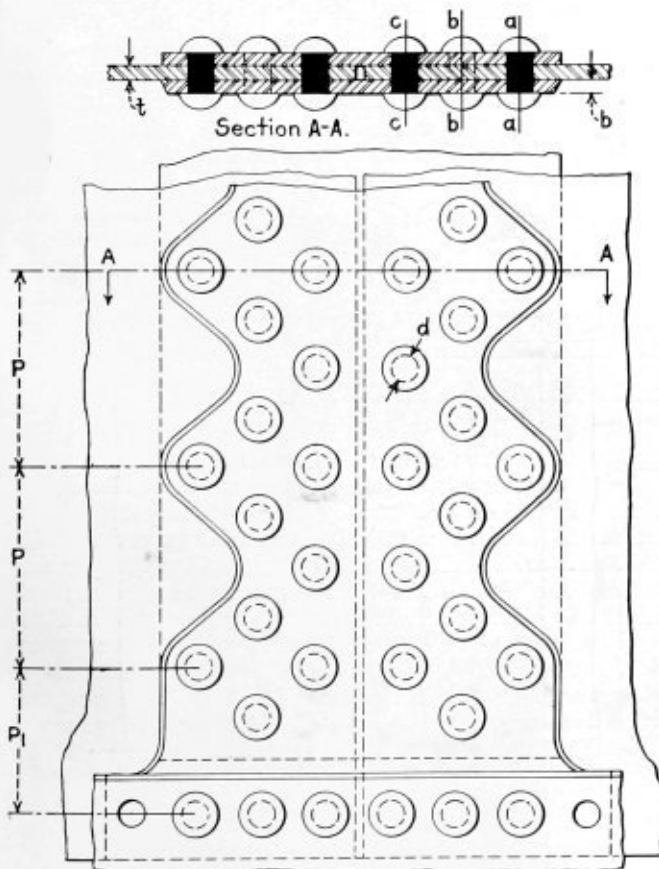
"Saw-Tooth" Joint, Triple Riveted
